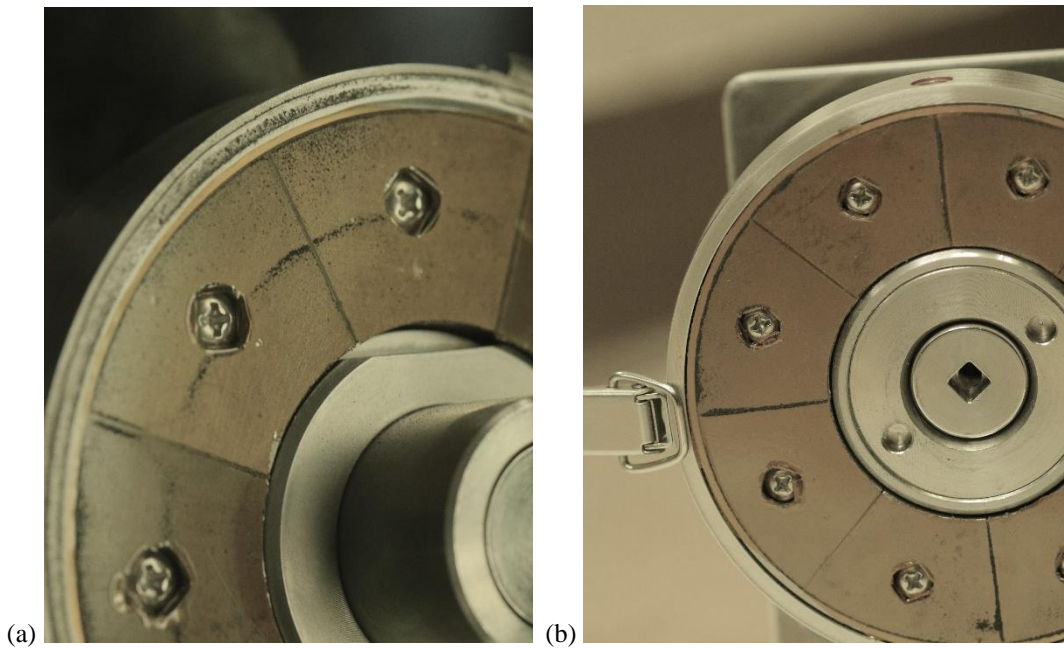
Dust captured by magnetic mating faces on the: (a) probe; and (b) socket sides of the CryoMag Coupler.
